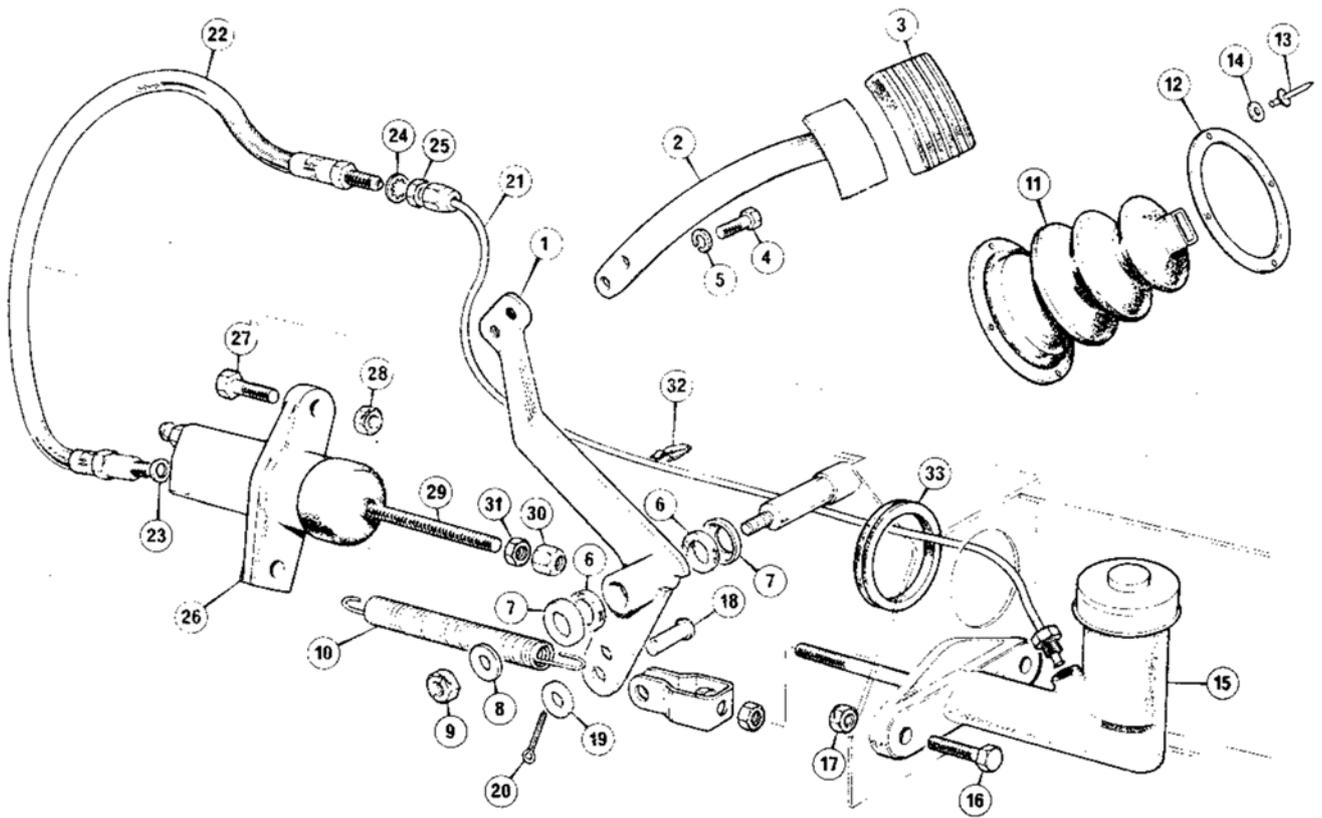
Clutch pedal assembly and hydraulics, 750 cc
